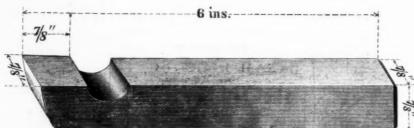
Tool for Finishing Bottoms of Nuts.
